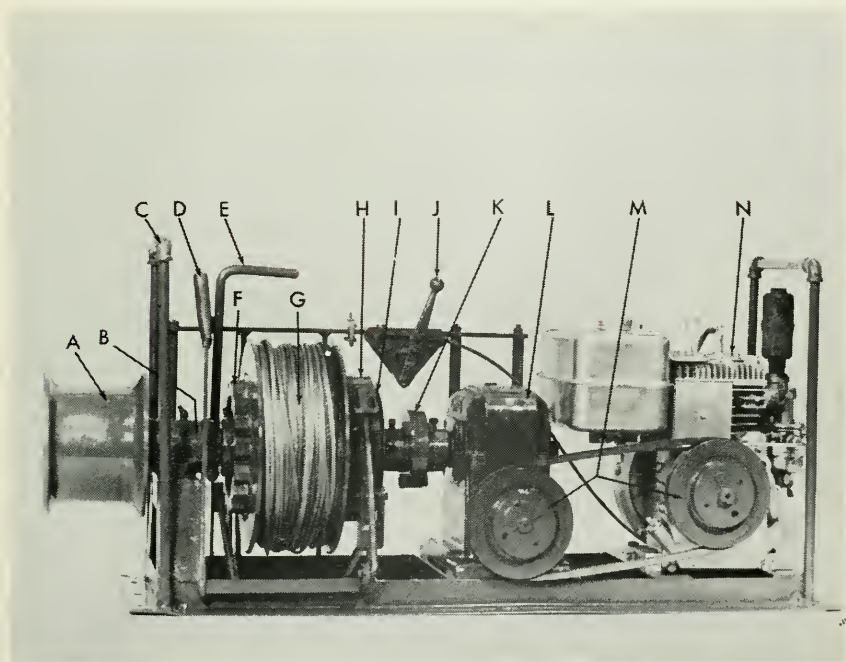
The portable trawl winch assembly is mounted on the forward boat seat with the cable drum approximately amidship. A, "gypsy head"; B, driveshaft bearing; C, carrying handle; D, brake lever; E, clutch lever; F, cable drum sprocket; G, cable drum with 600 feet of  $\frac{3}{16}$ -inch cable; H, contracting brake band; I, cone friction clutch; J, throttle; K, drive-shaft coupling; L, 50:1 ratio Ohio speed reducer; M, 1:1 ratio "V" belt drive; N, 2.75 horsepower Briggs and Stratton gasoline engine. Photograph by the Author, March 1960.
